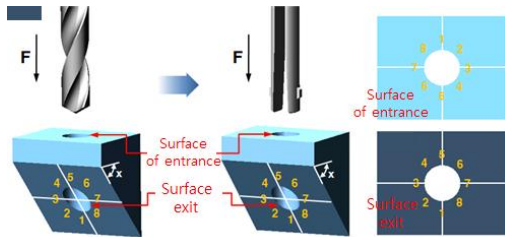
Experimental set up for drilling and deburring process and the burr measurement location along the periphery
